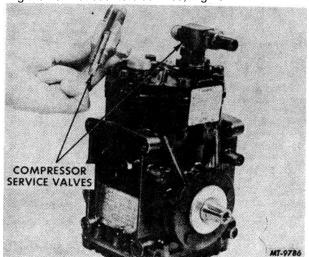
Removing Compressor Service Valves (Valve Cut Away for Illustrative Purposes)
